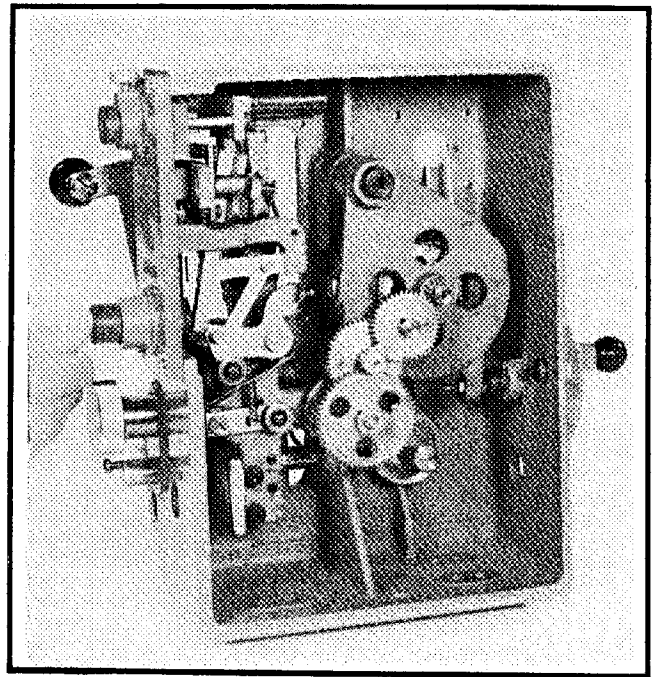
WELD SWITCH IS BLOCKED WITH RESET LEVER AT "ANNEAL" POSITION.
